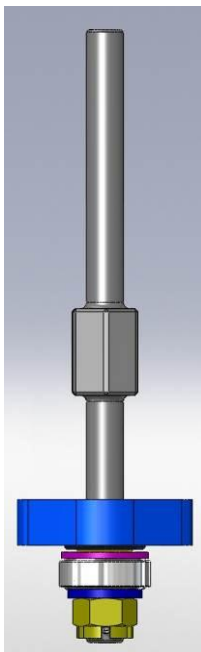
D0902454 Stage 1-2 Blade Puller Assembly Top Parts to slide from below through D0902191 Pre-Load Bracket Saddle
